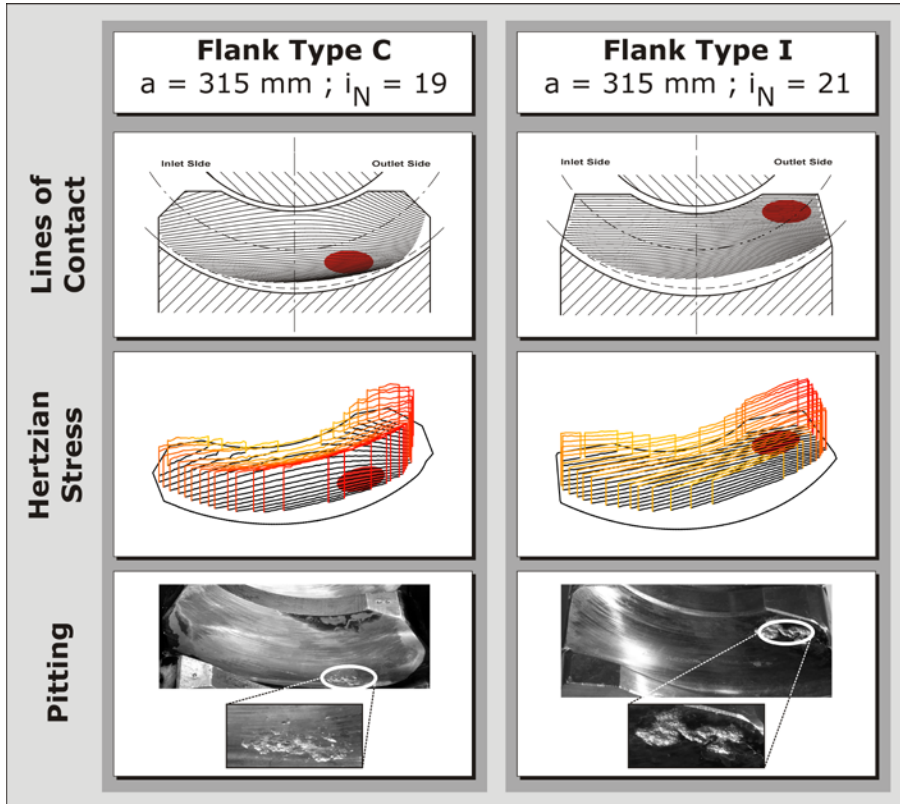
Location of pitting dependent upon flank type: Tests 7 and 8.
